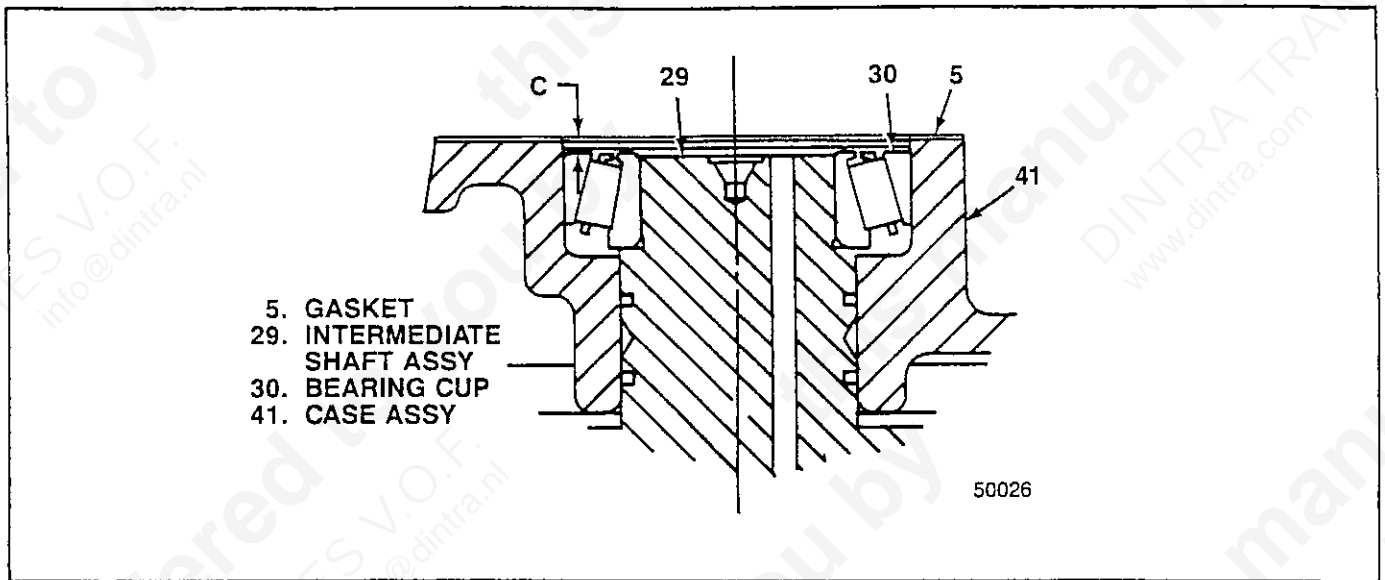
Determining Intermediate Shaft Bearing Thickness
